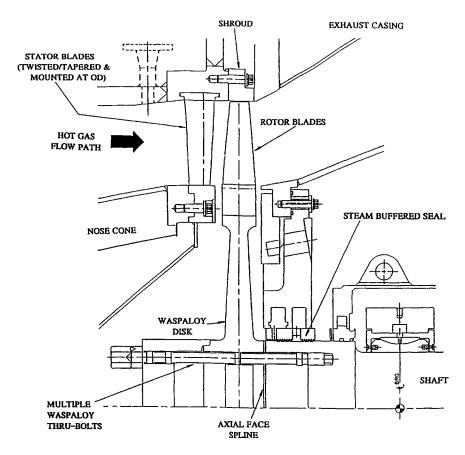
Axial entry hot gas expander, with principal parts identified.
